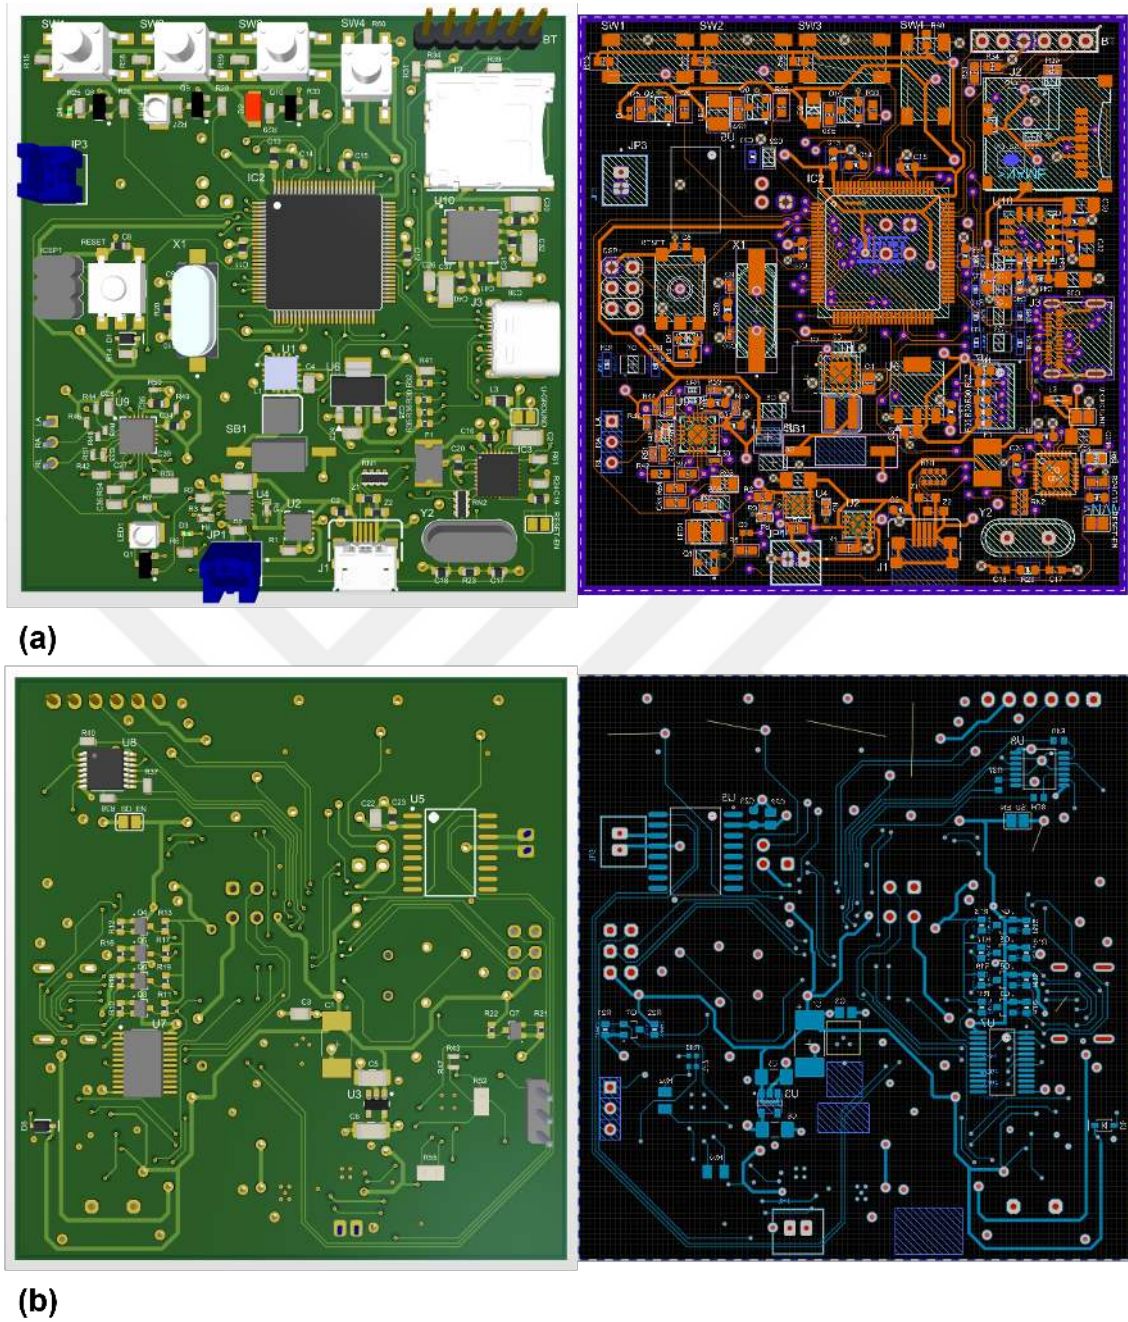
The PCB design of the main body fixed to the chest, (a) front and (b) back faces.
